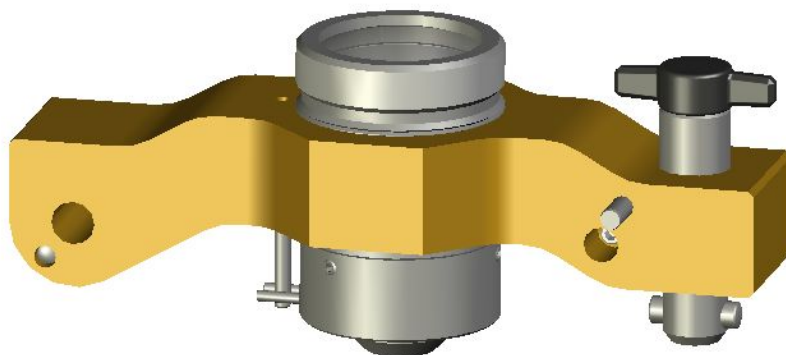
Side View of View-Thru Anvil Bridge Assembly
